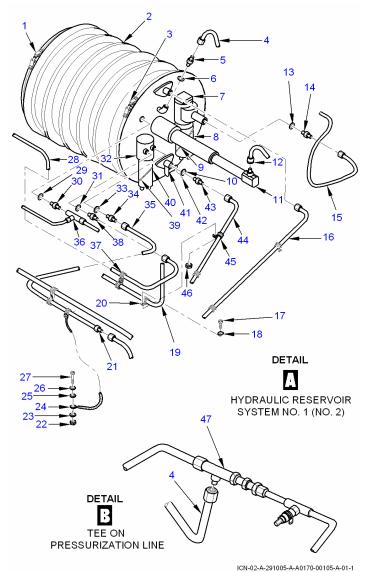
Hydraulic Reservoir - Removal and Installation (sheet 2/2)
